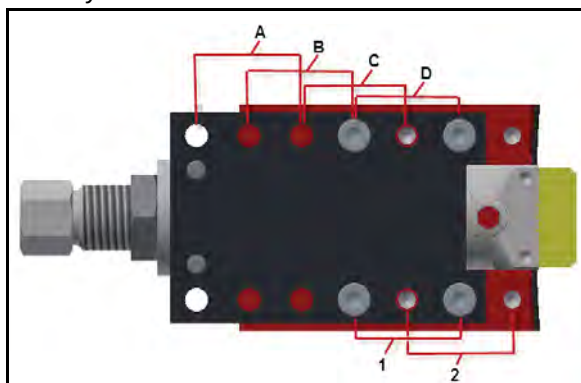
BOLT AND HOLE LOCATIONS
